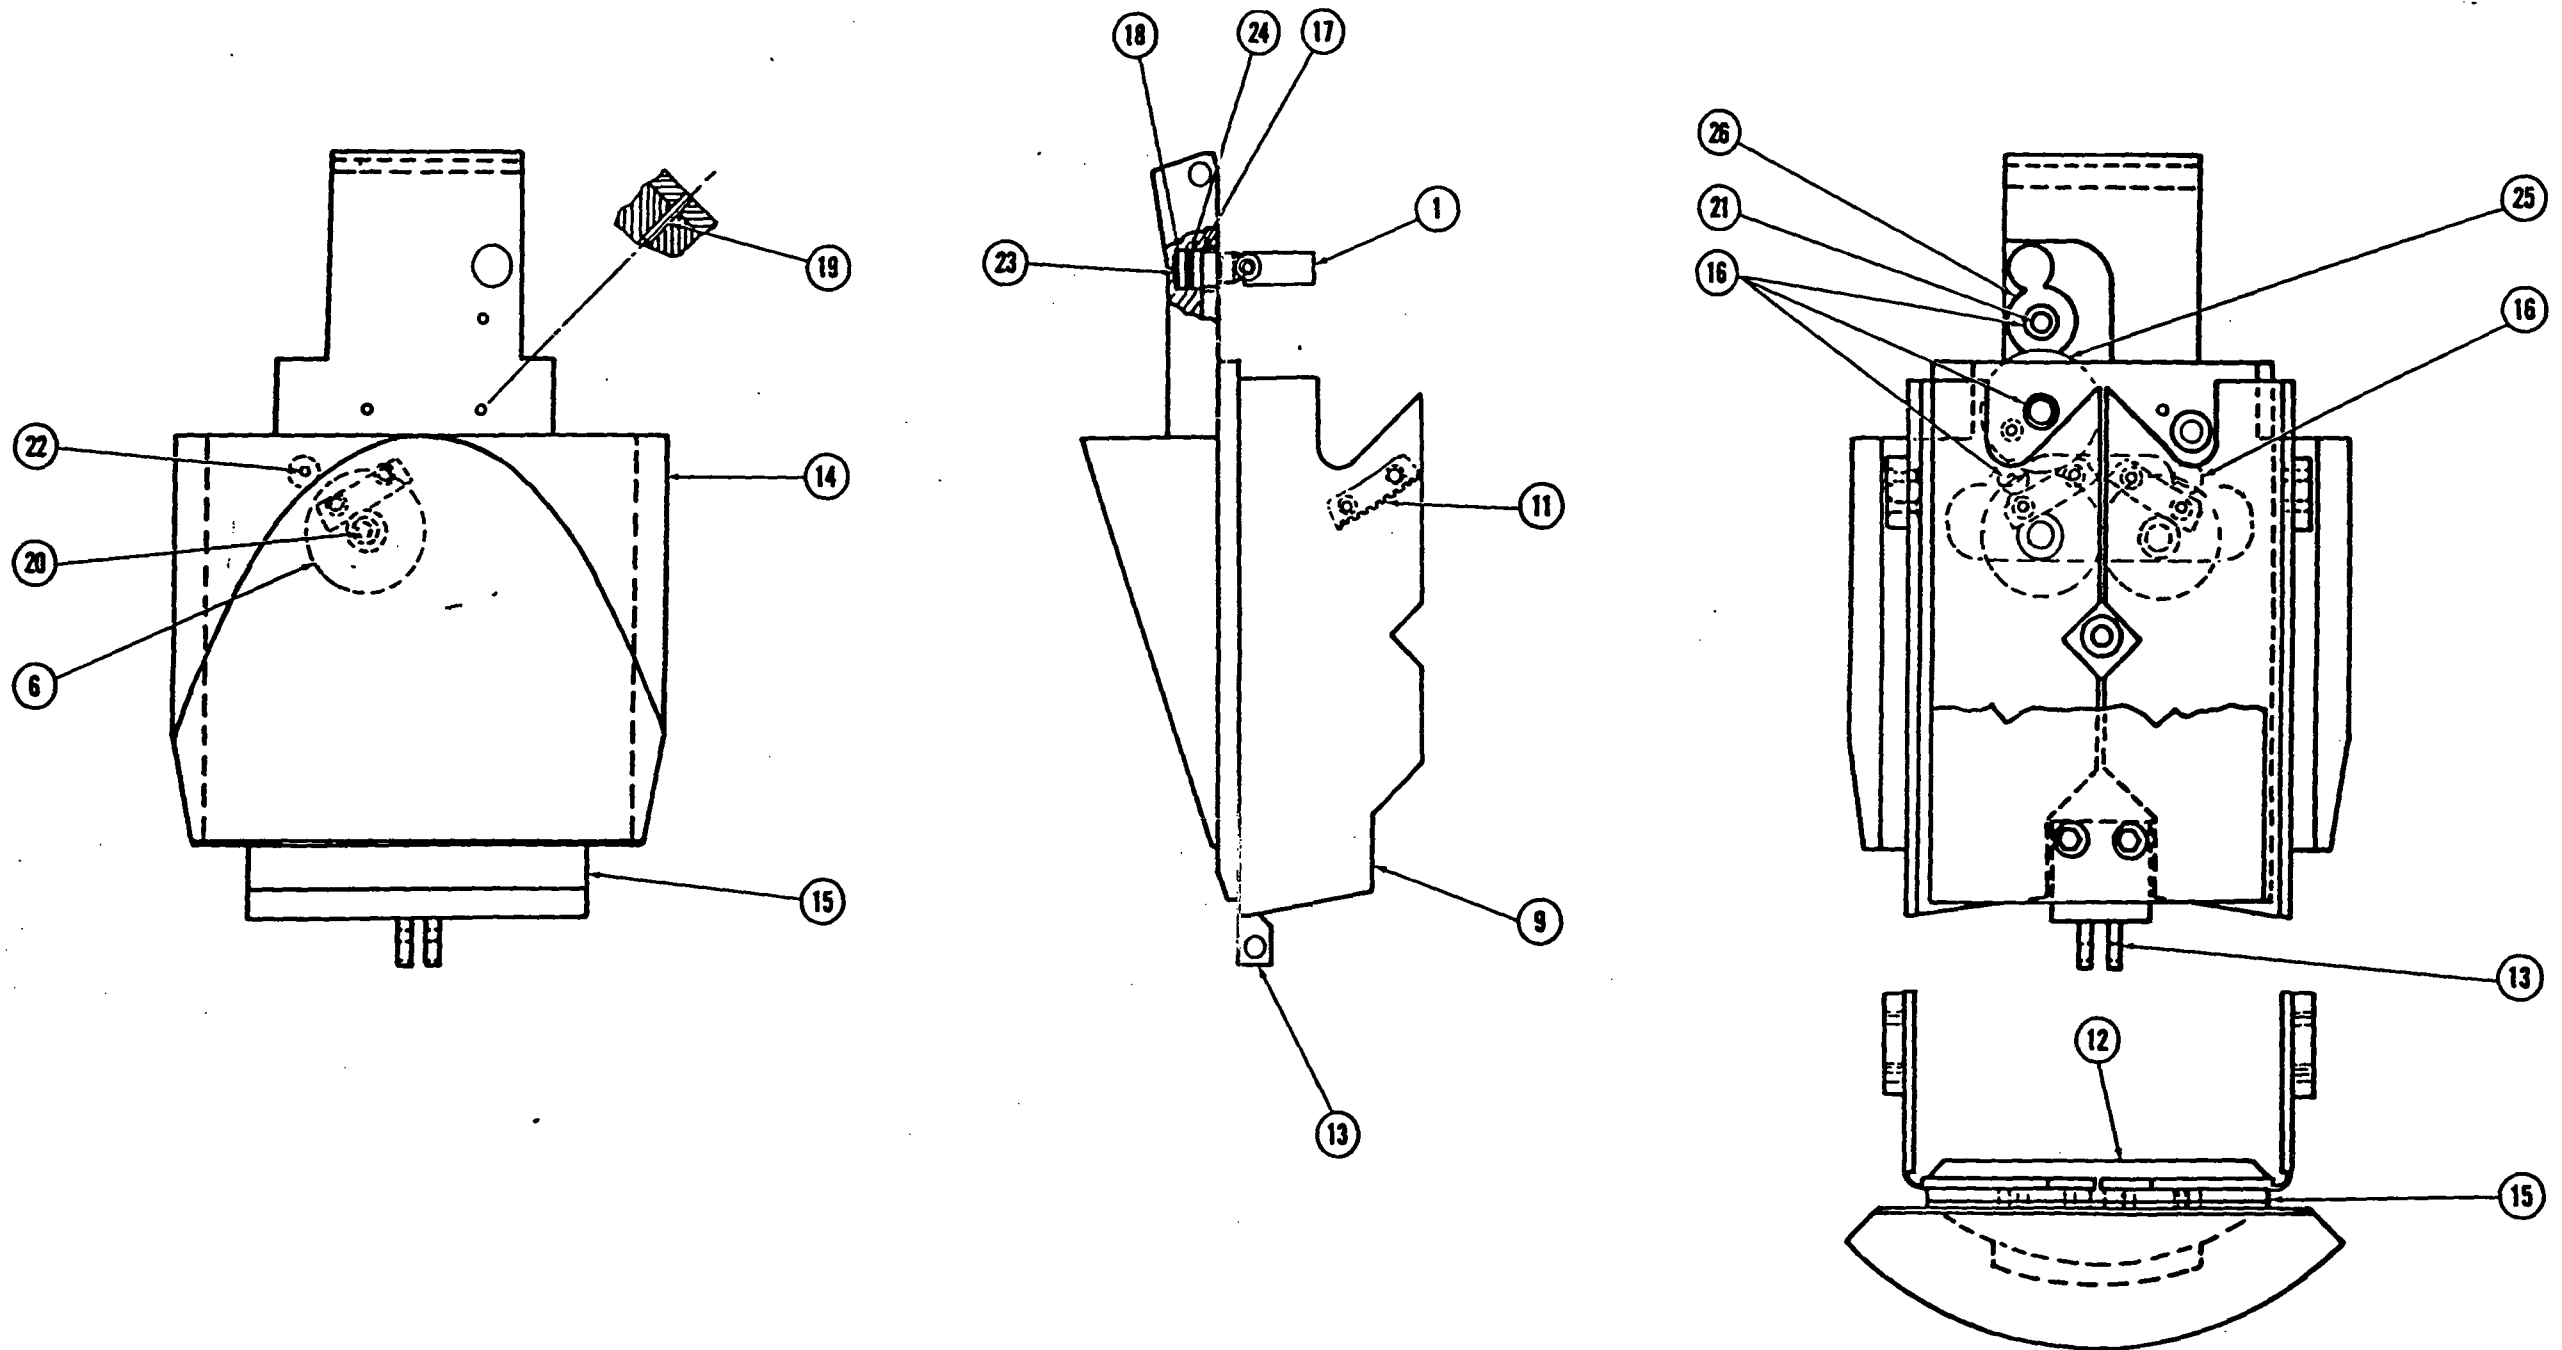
COLLIMATOR "C" SIDE PLATE
